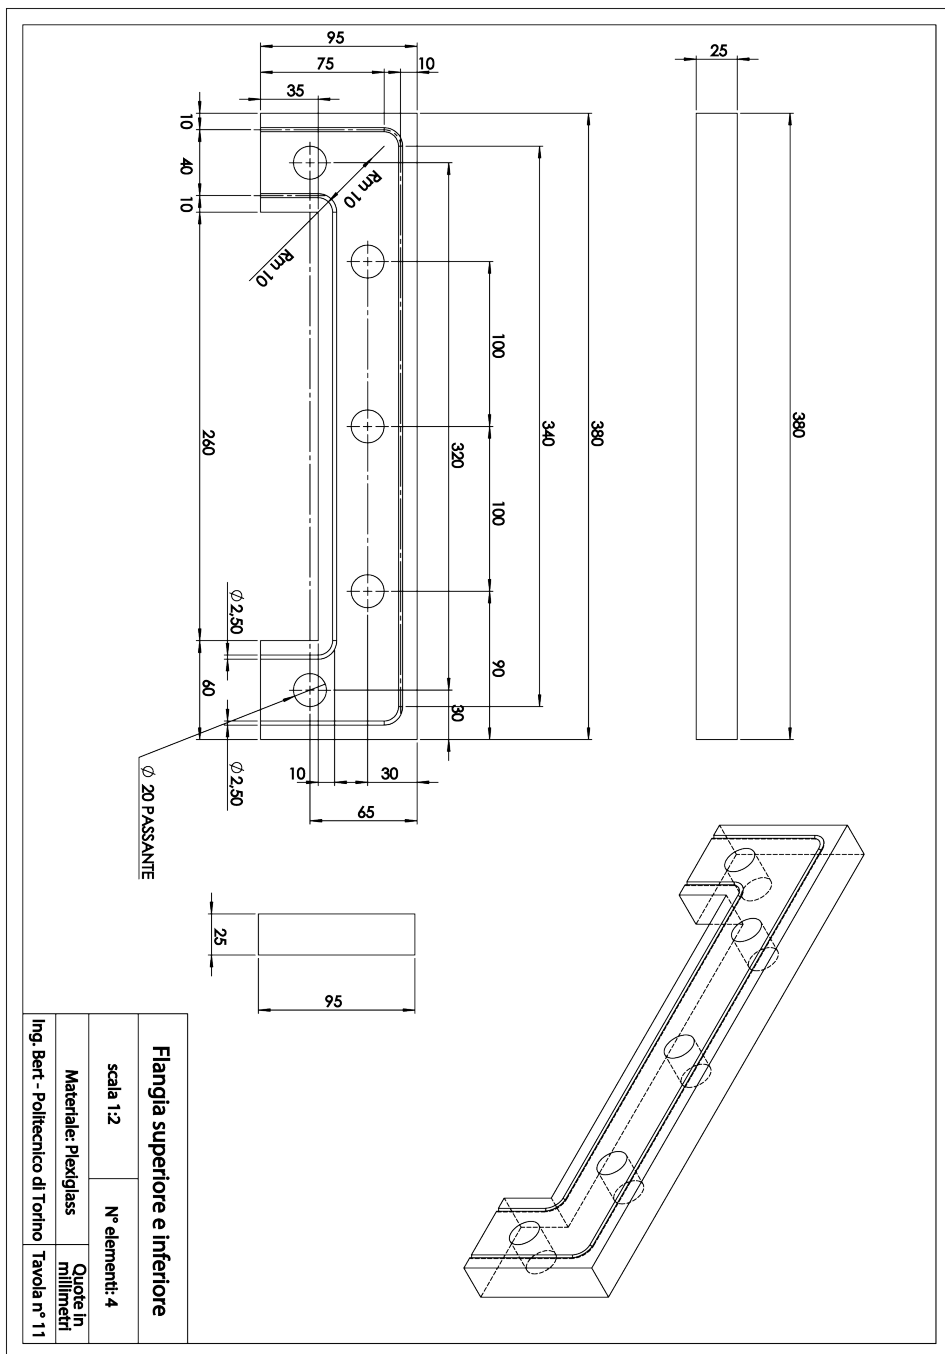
Upper and lower* flange of the test section. *Filtration tests.
